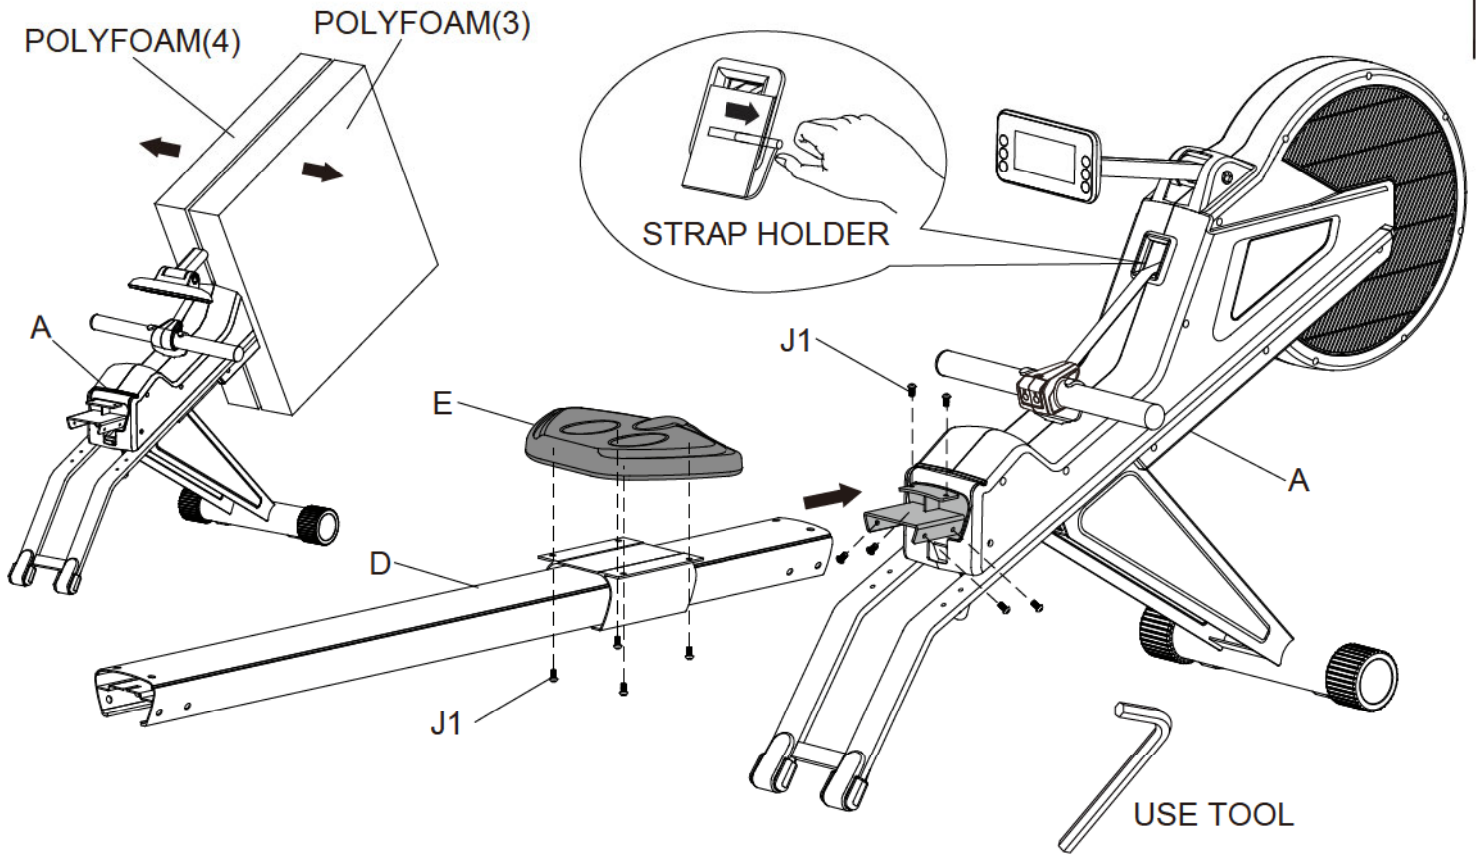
HOW TO ASSEMBLE THE REAR STABILIZER
